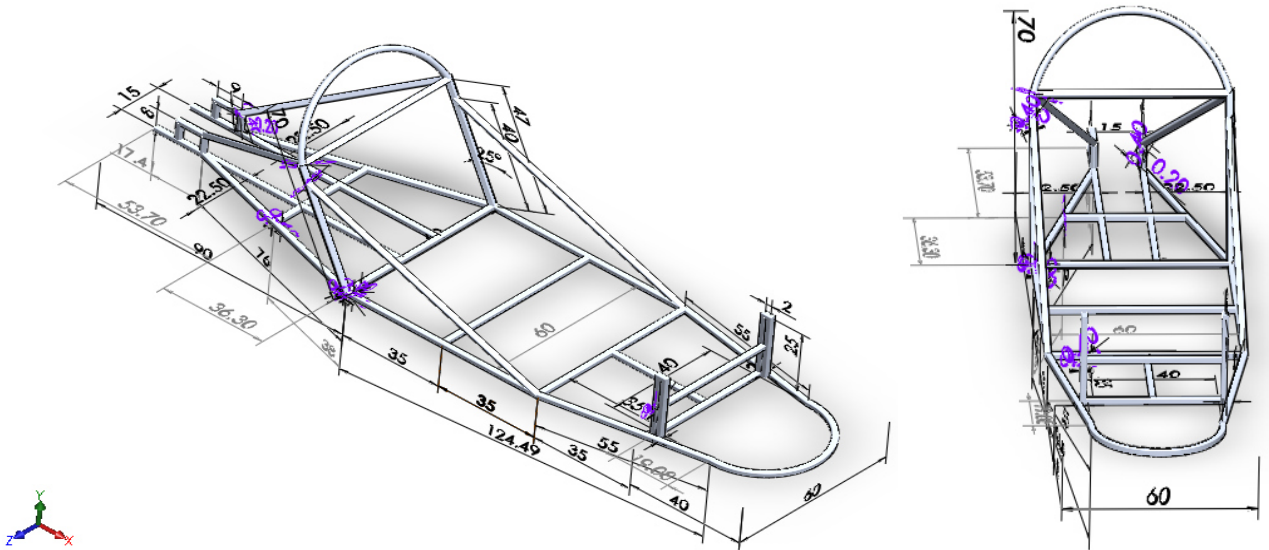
3-D model of the prototype chassis (dimensions in cm)
